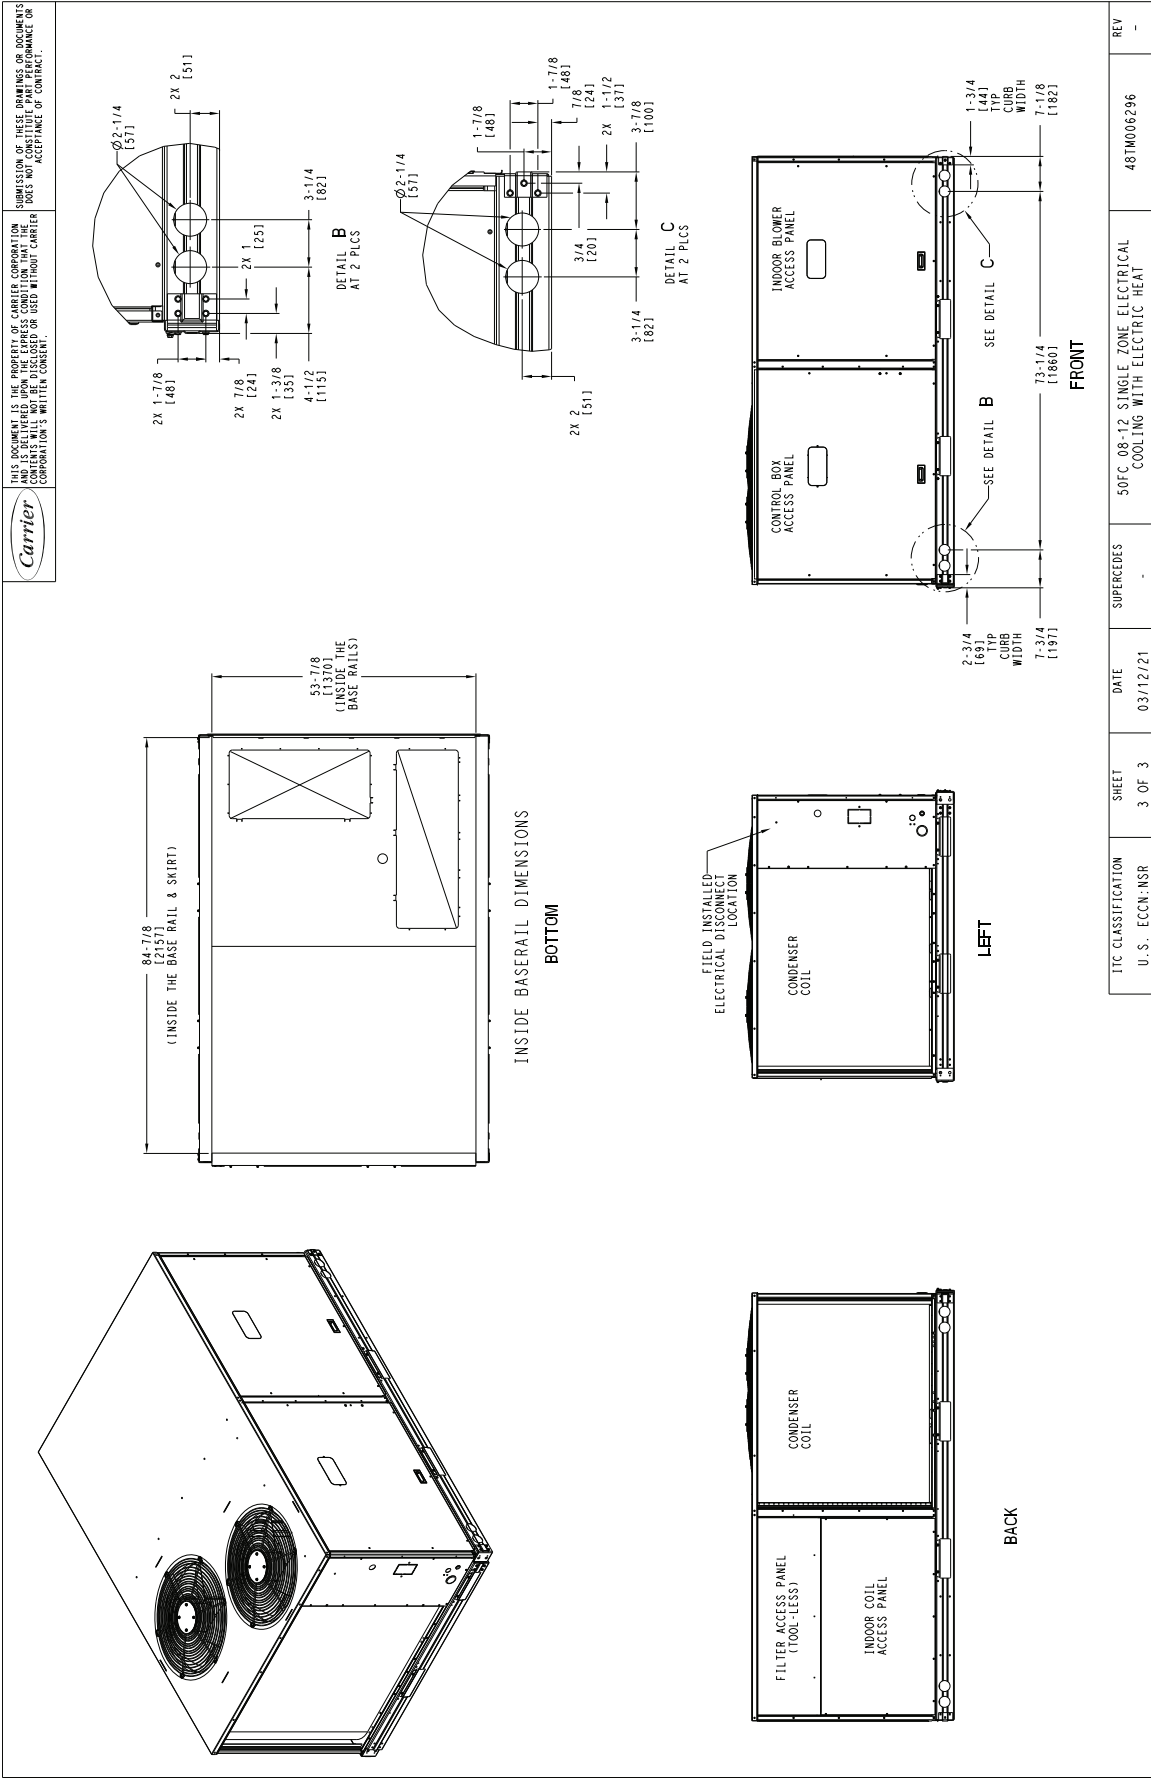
50FC08-12 Dimensional Drawing (cont)
